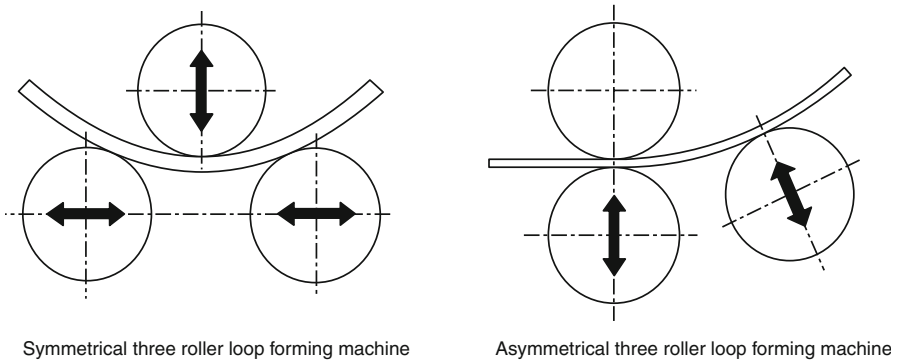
Roll arrangement for a three-roll round bending machine [ZICK79]
